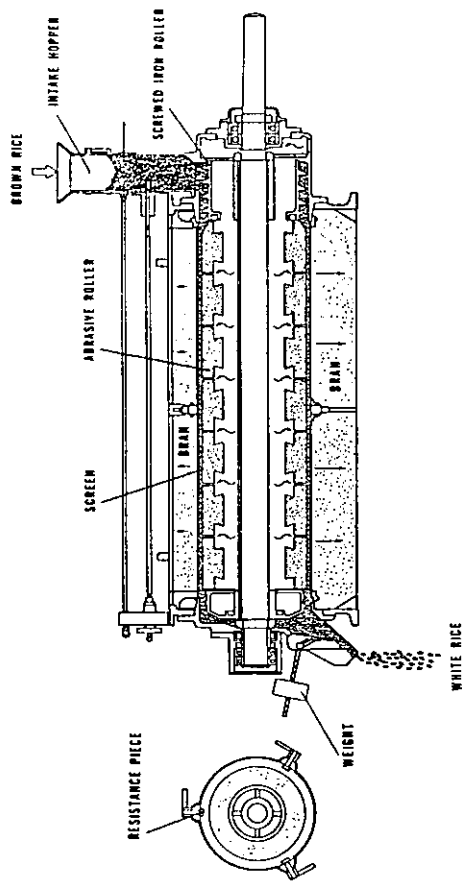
Horizontal abrasive-type mill. Courtesy of Satake Engineering Co.
